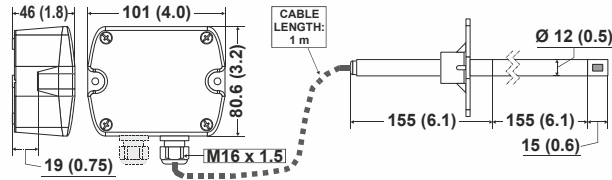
Dimensions, AV-R-10, in mm (inches)
